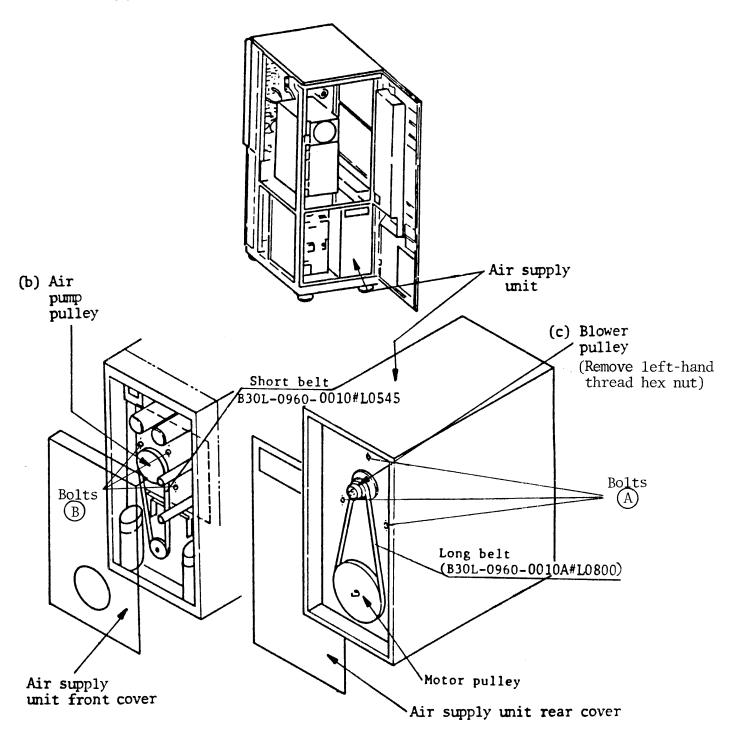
Air supply unit: vacuum blower and motor pulleys.
